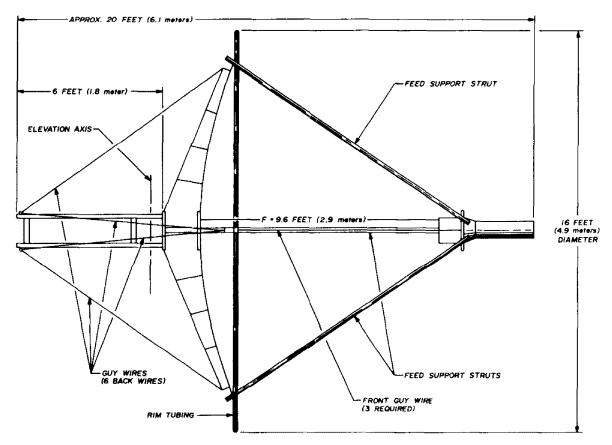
Skeleton plane view showing rigging and overall dimensions for the 16-foot (4.9-meter) diameter parabolic reflector.
